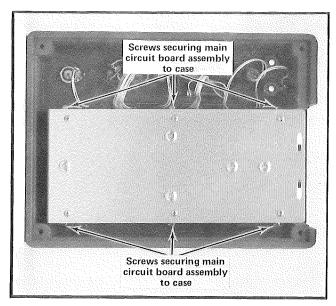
Screws holding chassis-circuit board assembly to case.
